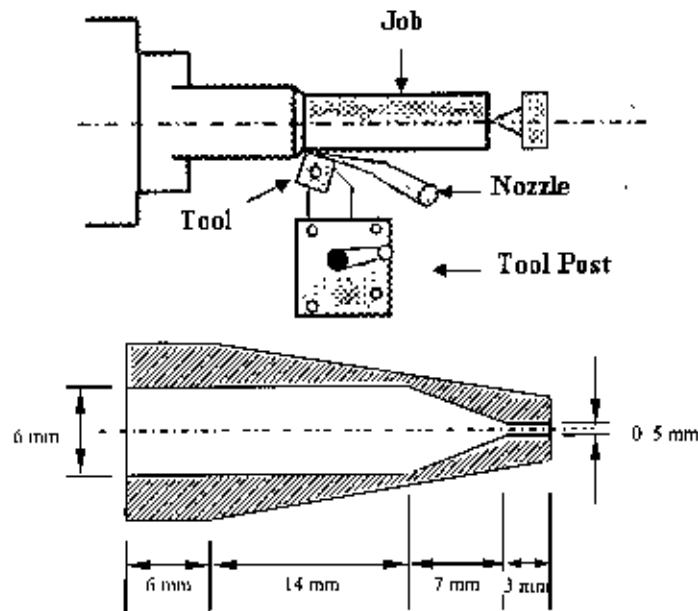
Schematic view of the nozzle used for coolant delivery at the cutting zone
